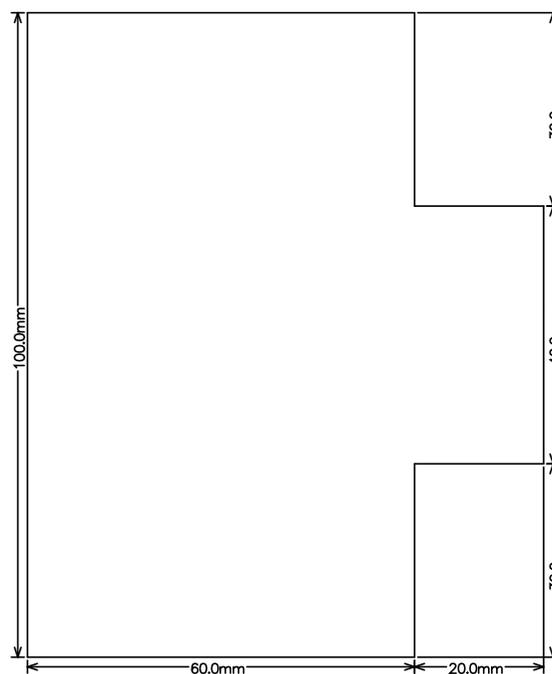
SIDEGIG-XOVEREVM Board Dimensions
